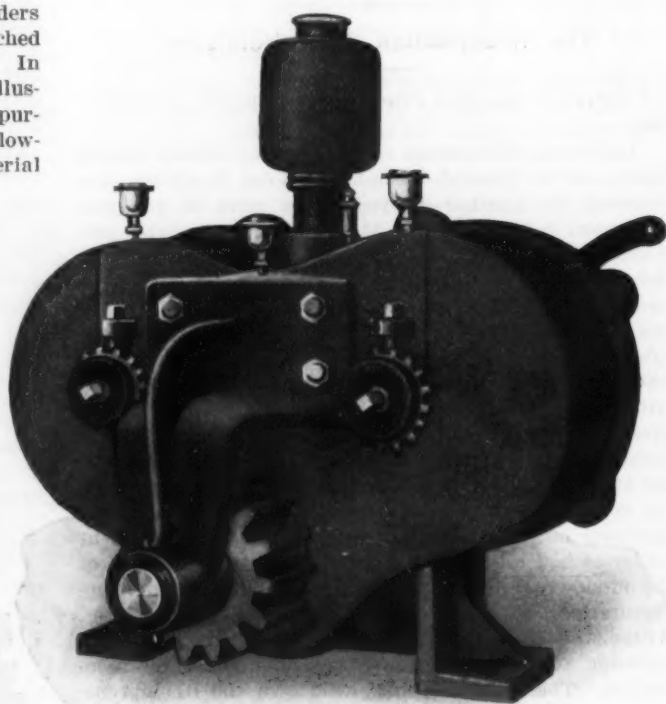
Rear View of Engine, Showing Driving Pinion and Exterior Adjustment of Ports.
